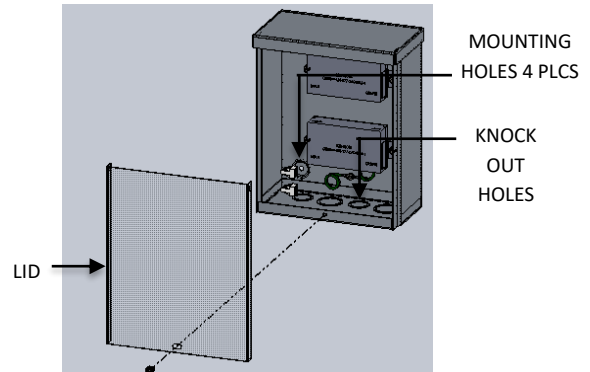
REMOTE DRIVER BOX ASSEMBLY FOR 72 MODEL
